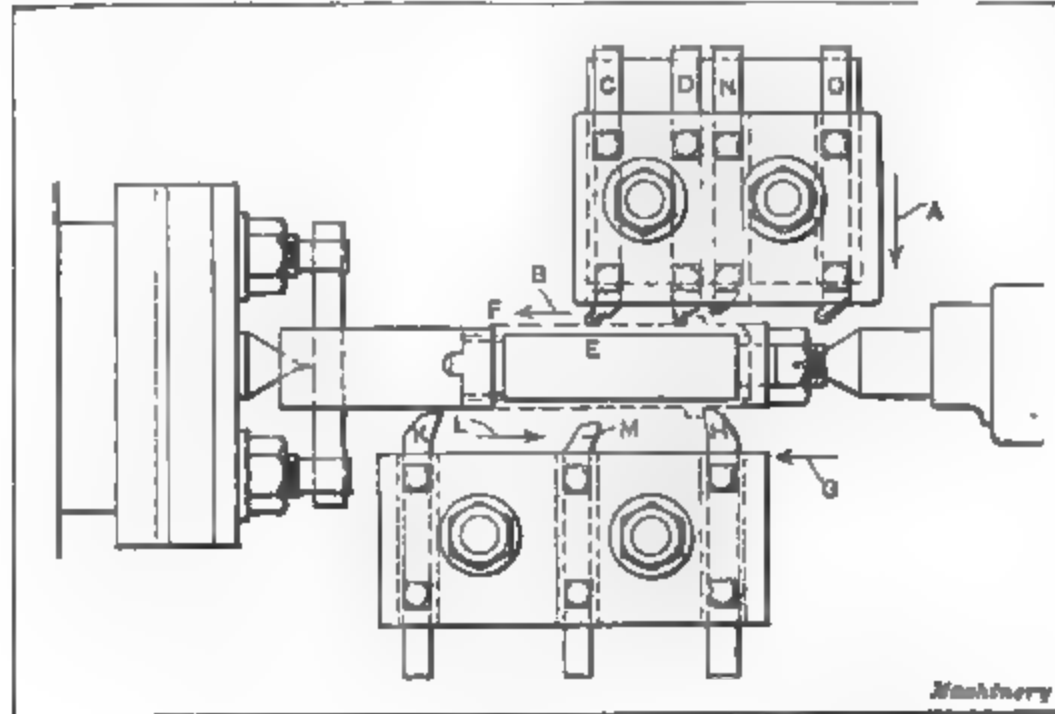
Tool Arrangement for turning Half-bushings shown in Fig. 3
